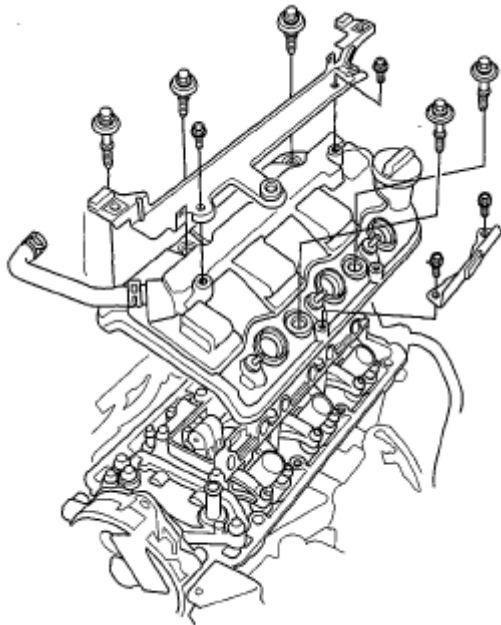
Identifying Front Cylinder Head Cover And Clips
